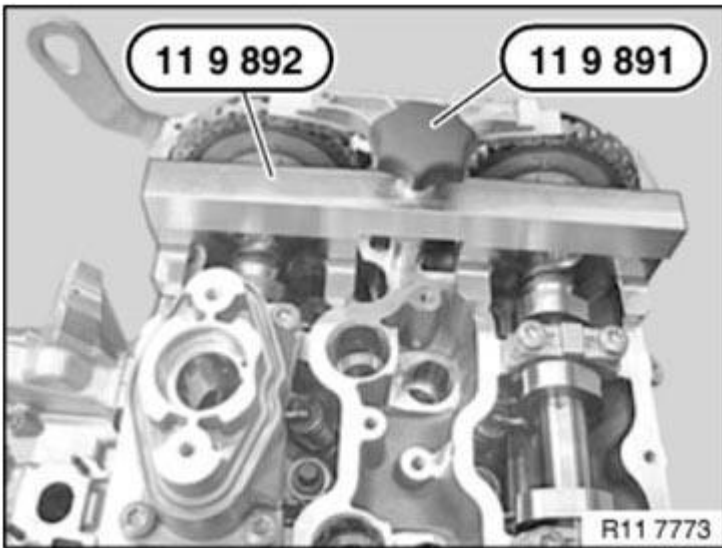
Positioning Special Tool 11 9 892 On Special Tool 11 9 893
